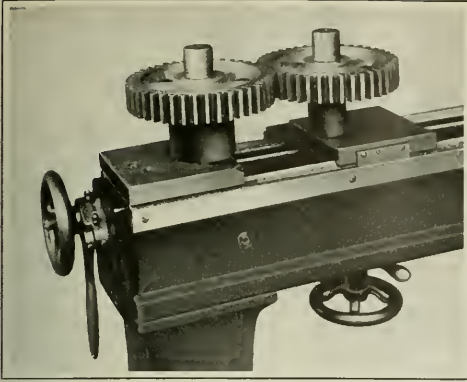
Fixture for testing the Concentricity of Spur Gears
